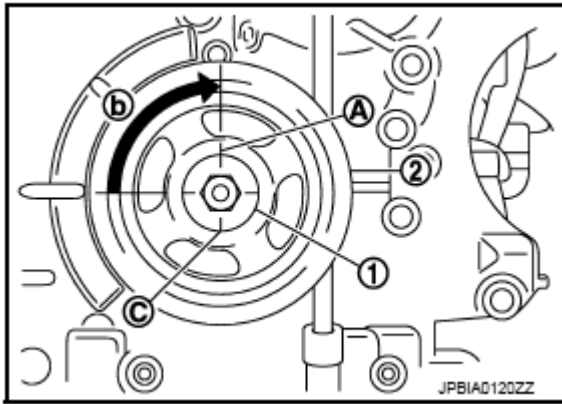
Tightening Crankshaft Pulley Bolt 90 Degrees
